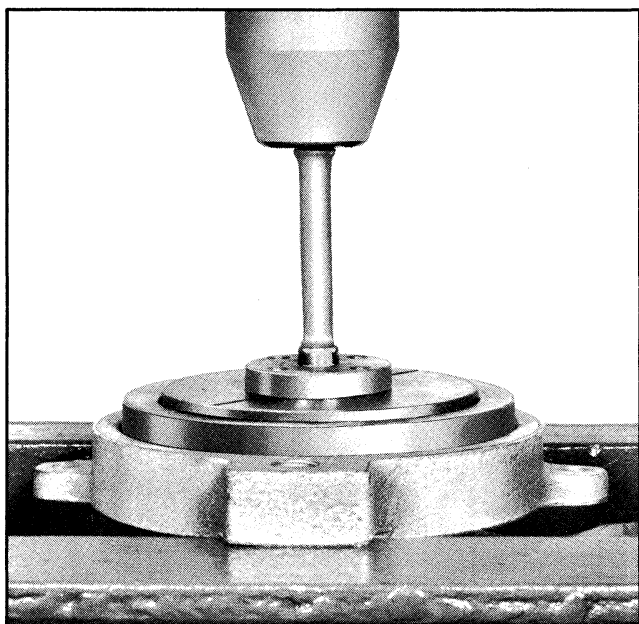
A-19 Pressing Pump Shaft From Hub (6 Cyl.)
